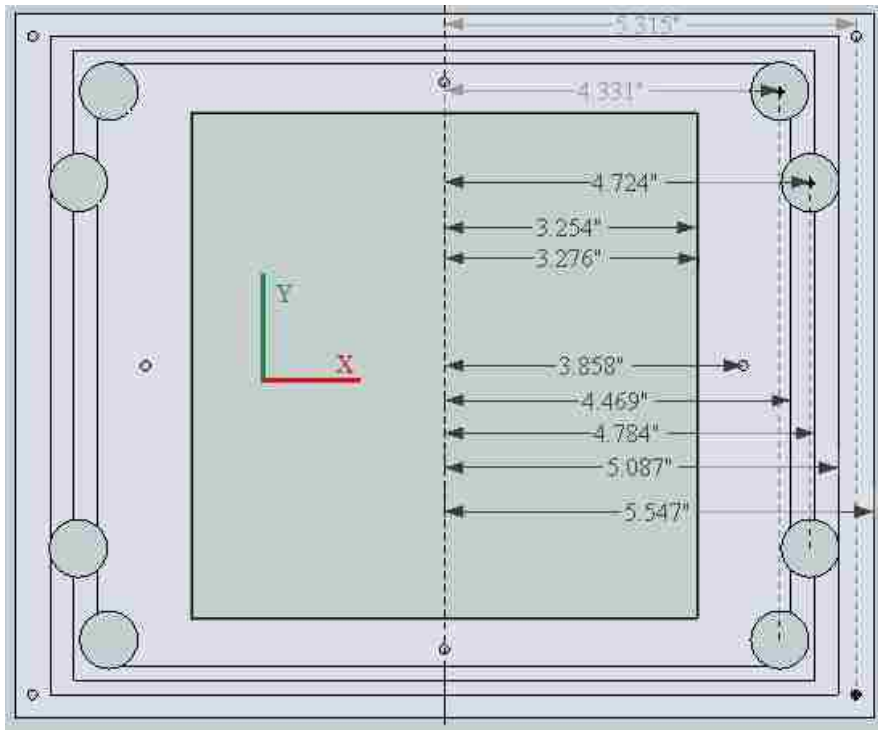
Top view of the 20x20 cm² upper trimmer lead plate illustrating the cross-plane dimensions.
